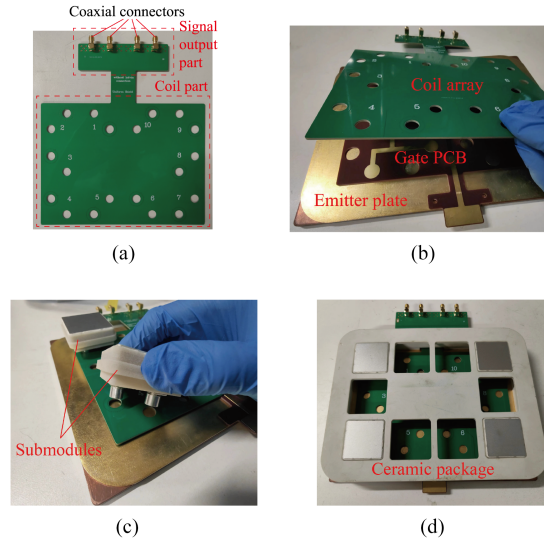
Way to integrate the coil array into the IGBT device. (a) Appearance of the coil array. (b) Assembly of the coil array. (c) Assembly of the submodules. (d) Assembly of the ceramic package.
